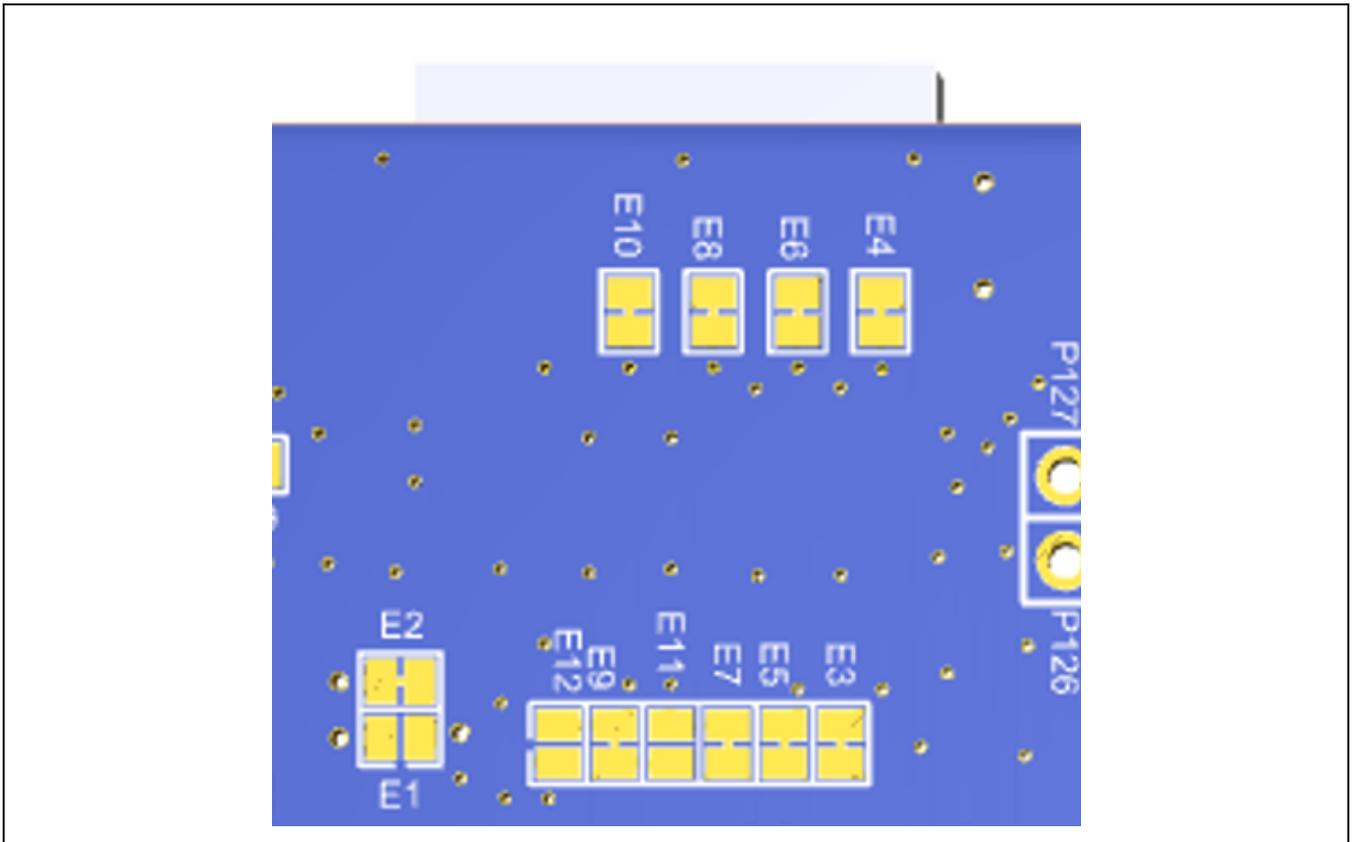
Assignments of Jumper Trace Cuts and Jumper Solder Bridges for Pmod 1 (Soldered Side)
